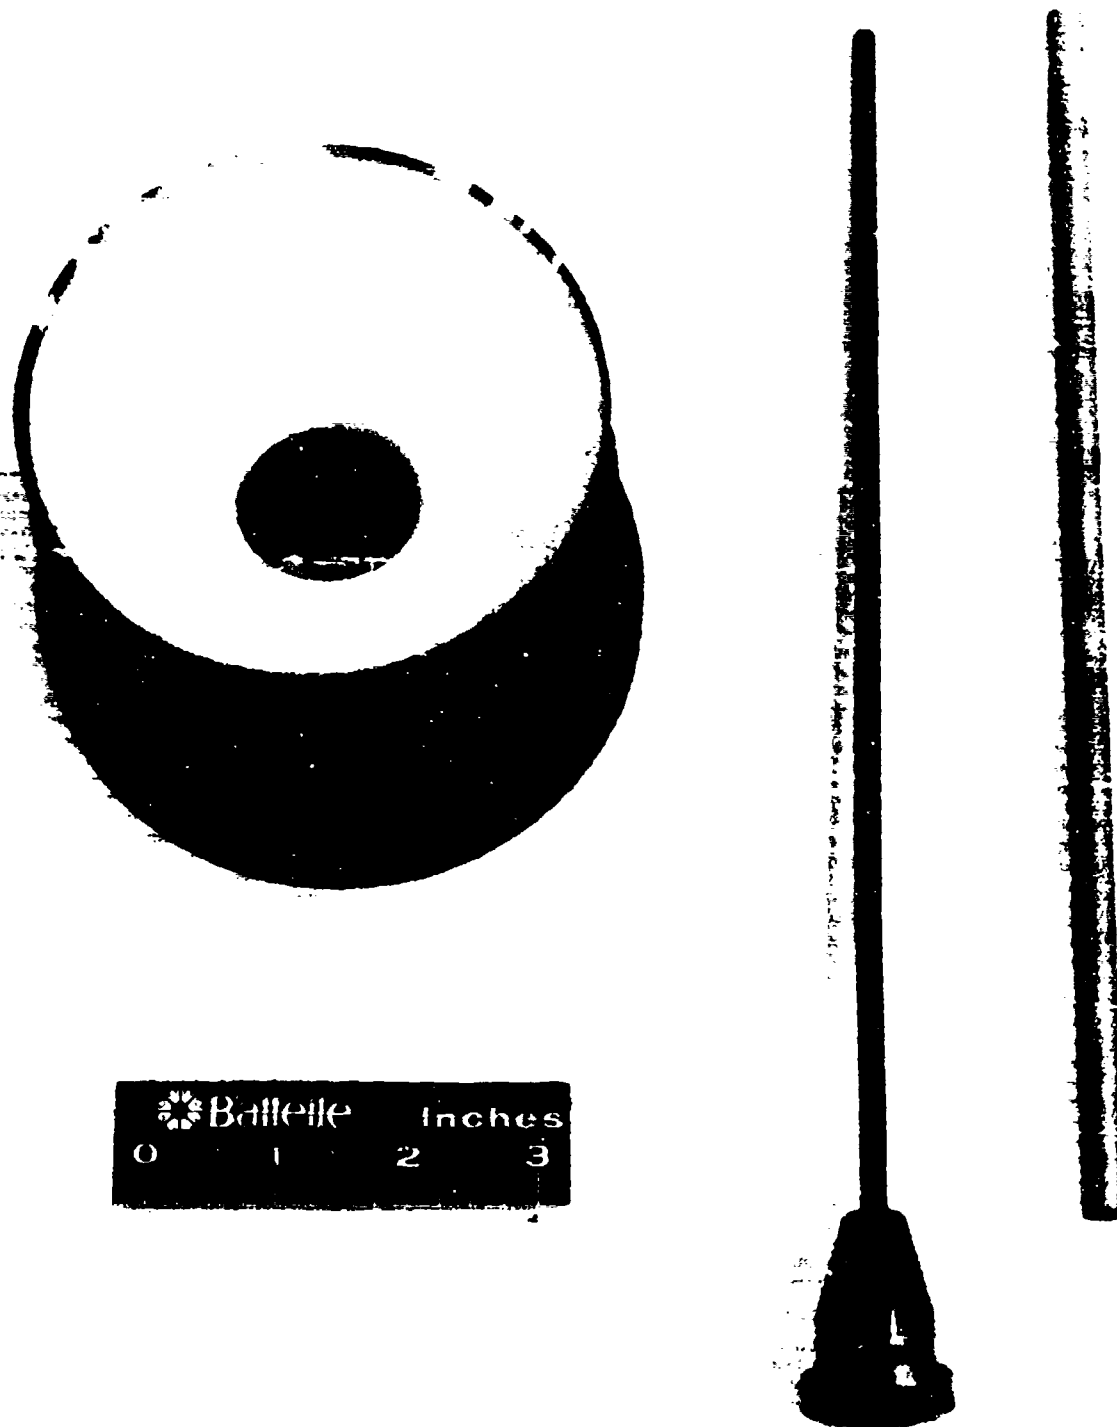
Ceramic-Coated Die, T-1 Tool Steel Mandrel, and Mild Steel Mandrel Sleeve Used for .220 Swift Barrel Extrusion
